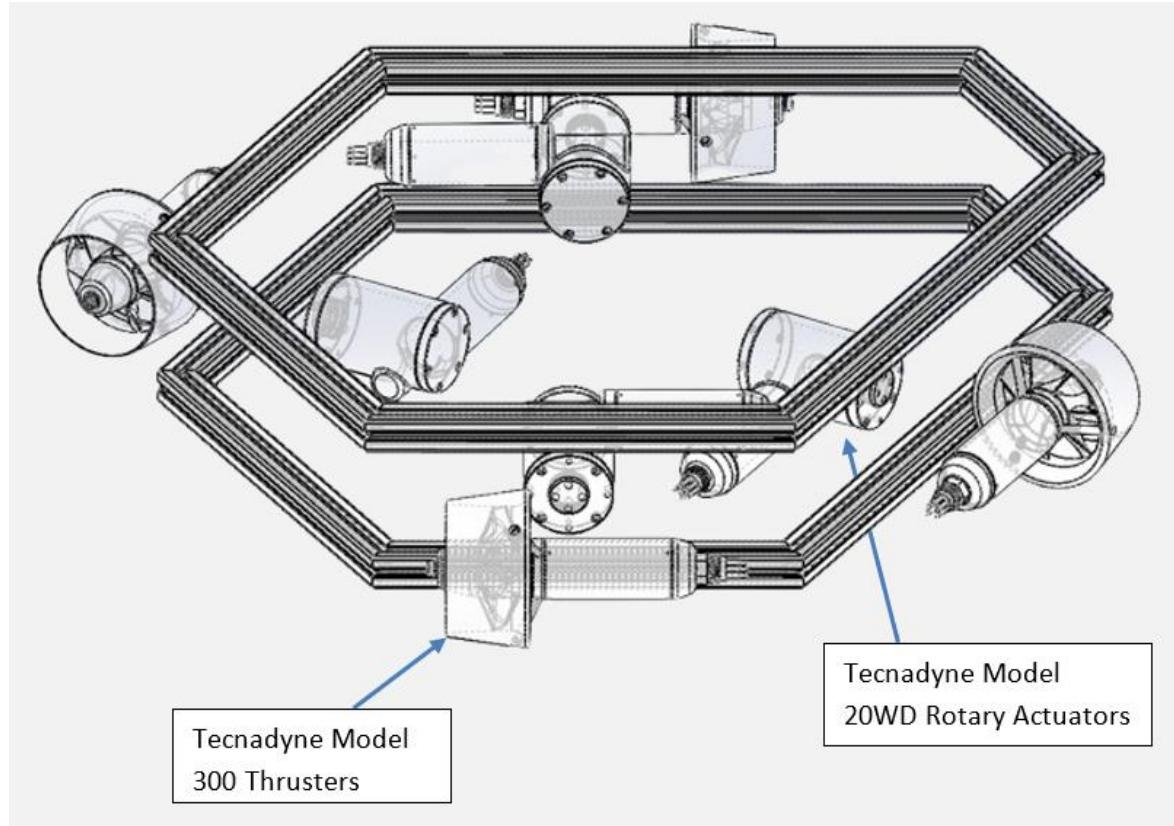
The CAD drawing with the Tecnadyne Model 300 thrusters and Tecnadyne Model 20WD rotary actuators labeled.
